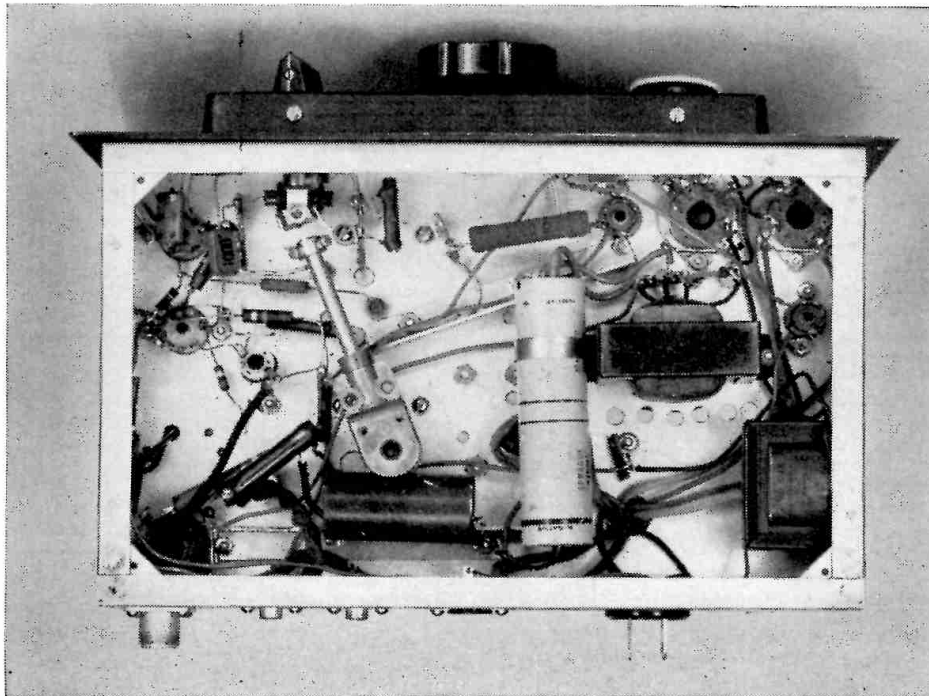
Bottom view of the v.f.o. unit. The right-angle drive, right of center, drives the band-spread switch S_1 . The small sections of aluminum angle stock are stiffeners added after the components were mounted. The method suggested in the text is preferable.
